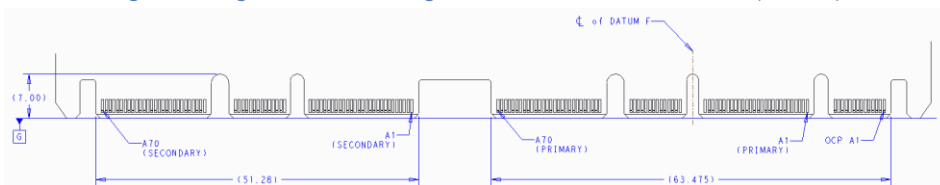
Large Size Card Gold Finger Dimensions – x32 – Bottom Side (“A” Pins)
